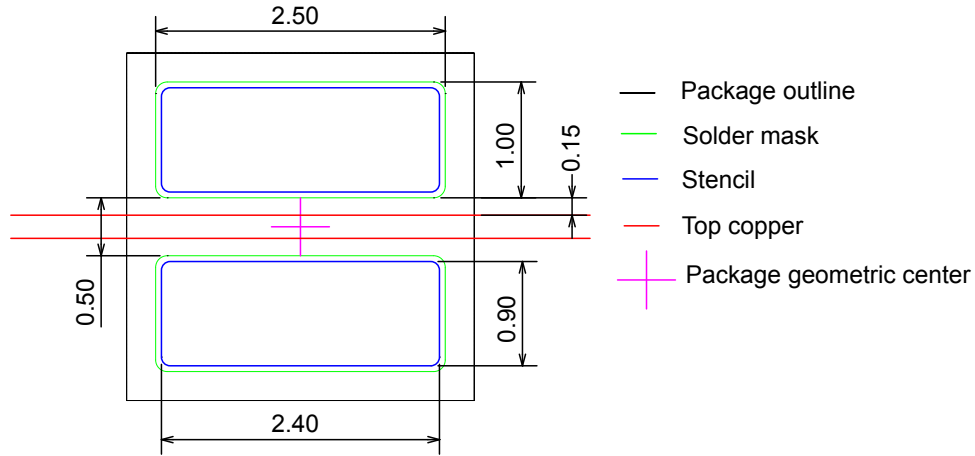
Recommended PCB solder pad layout for LUXEON HR30.
